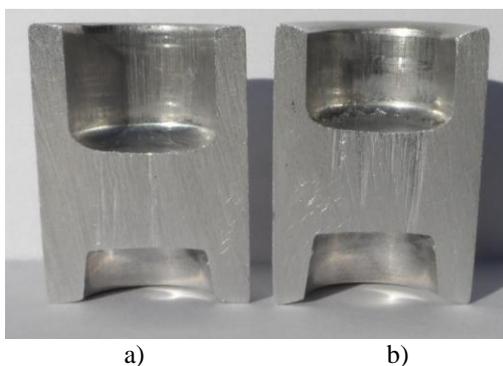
Axial section of the test specimens extruded in different friction conditions: a) - palm oil; b) – boric acid combined with rapeseed oil (punch stroke: 11 mm)
